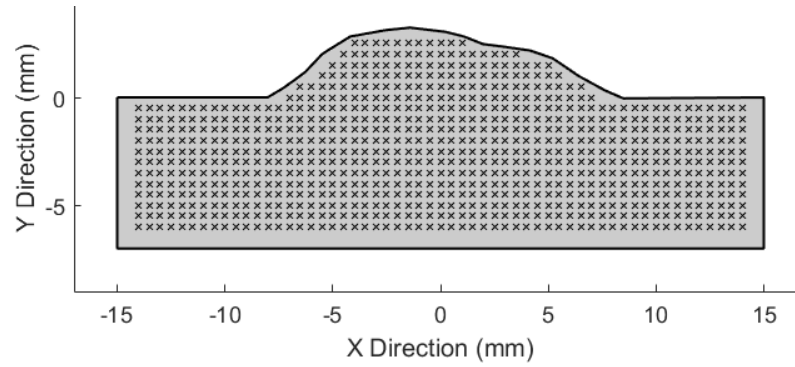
Example of test points for hardness mapping on a BoP weld sample.
